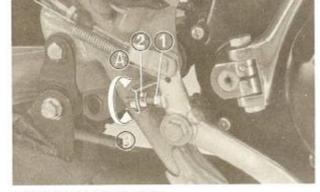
(1) Adjusting bolt (2) Lock nut
